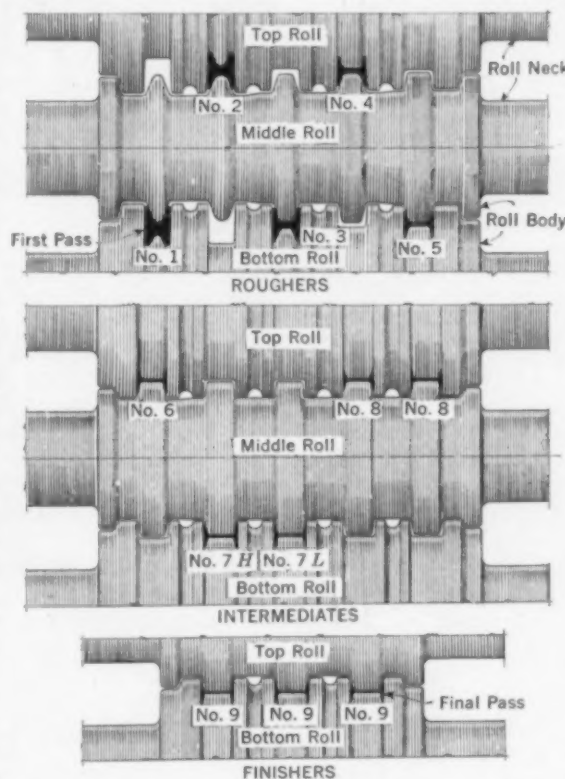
TYPICAL ARRANGEMENT OF ROLLS AND PASSES IN ROLLING STANDARD BEAMS
